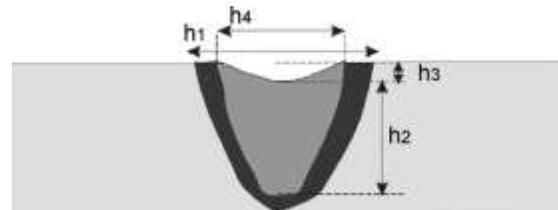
Characterization of welding cross-section.[1, 2]
